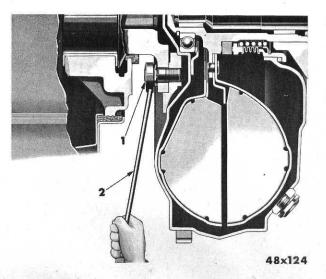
Removing Driver Flange Stud Nuts (1) with Tool C-589 (2)
